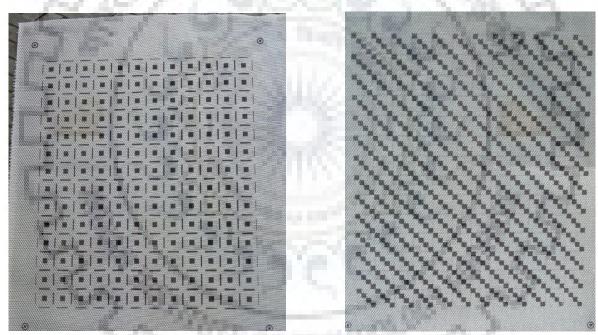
Top and Bottom view of fabricated Asymmetric FSS
